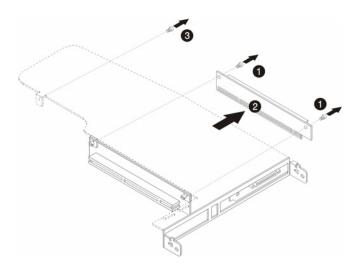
Removing the default standard height/full-length PCI-X riser board
